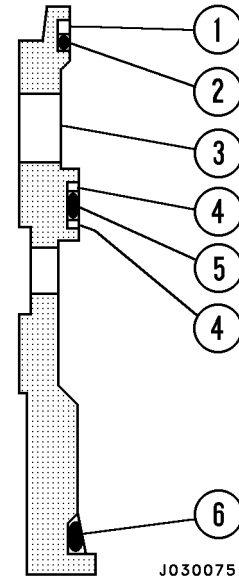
SLEEVE SEAL PLACEMENT
